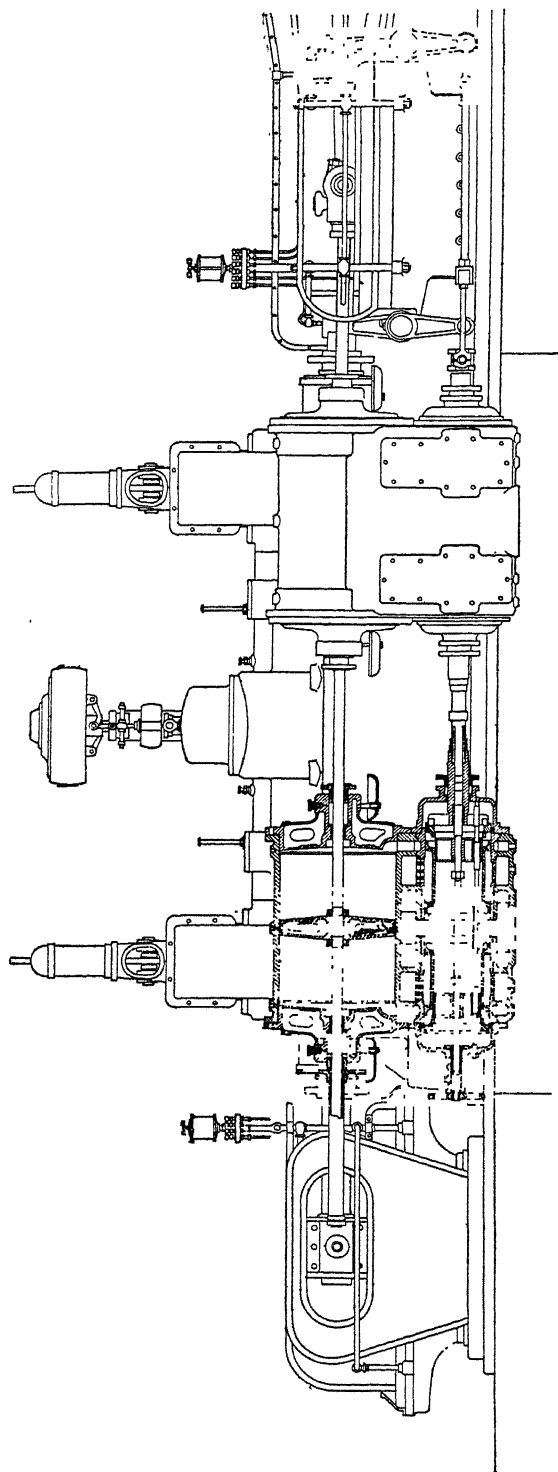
H.P. KÖRTING GAS-ENGINE, BY KÖRTING BROTHERS, KÖRTINGSDORF. (Longitudinal Section and Elevation.)
